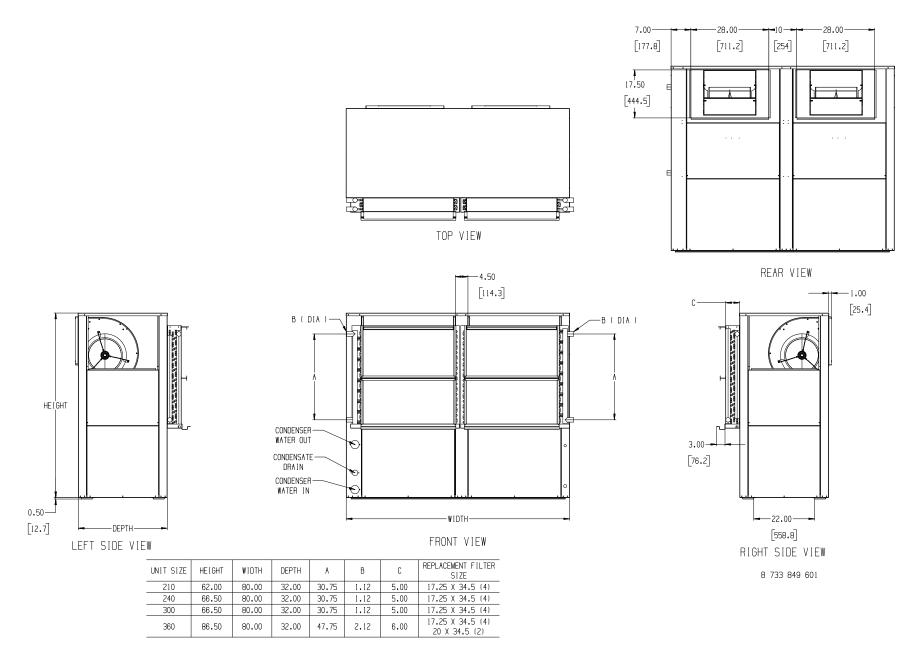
50VQP210-360, Front Return, Rear Discharge with Hot Water Coil
